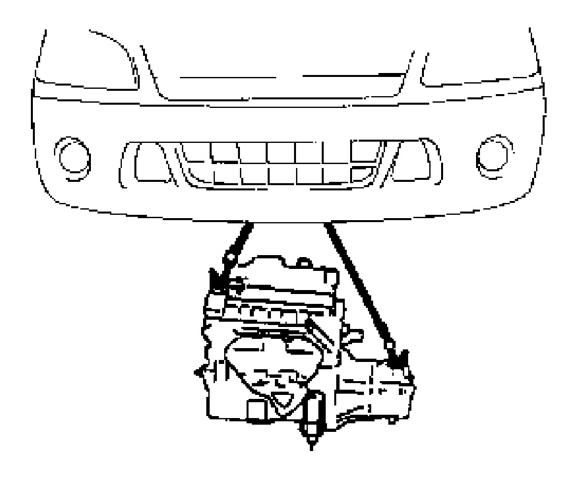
Removing Front Suspension Frame For 4WD Vehicle Courtesy of SUZUKI OF AMERICA CORP.
